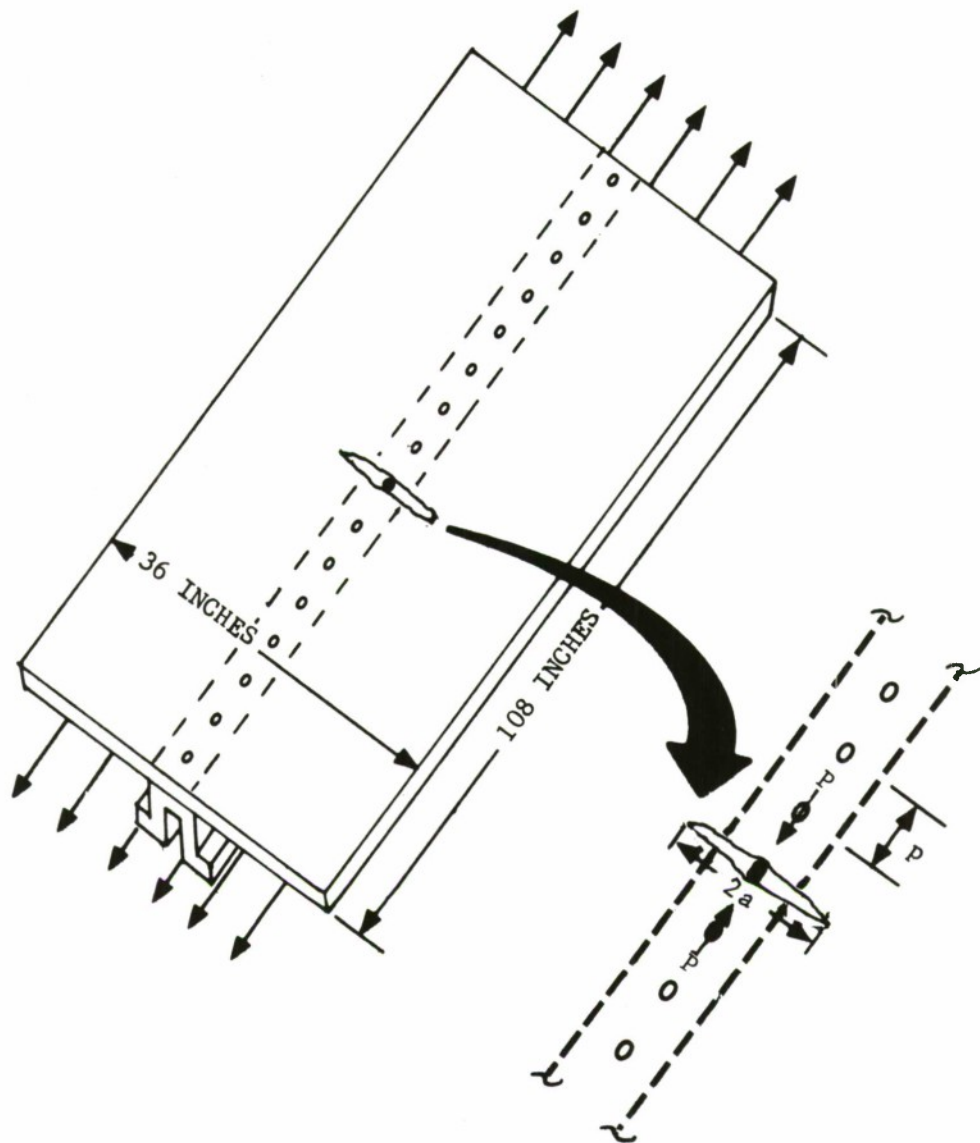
CRACK AT RIVET IN A RIVETED SKIN-STRINGER PANEL
